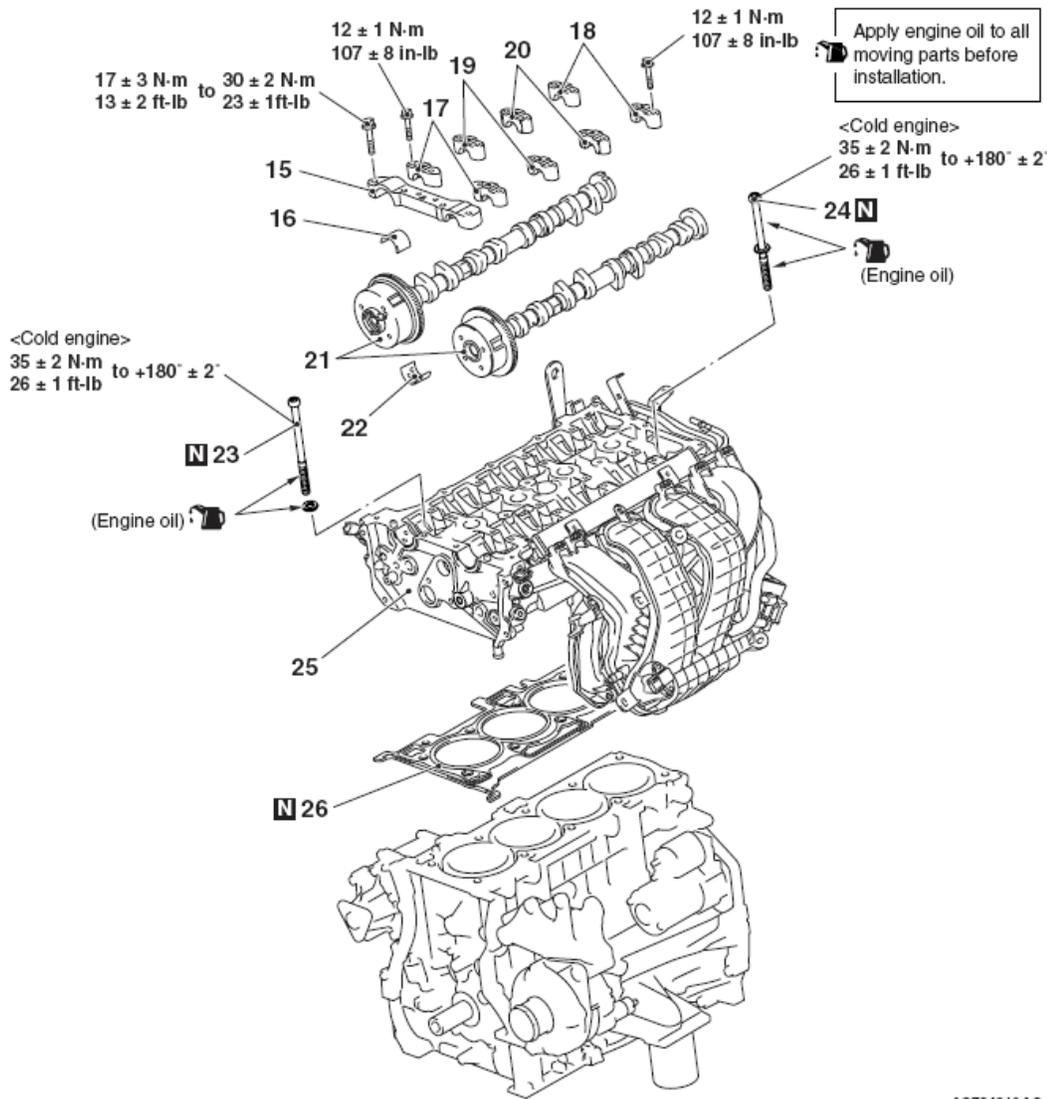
Identifying Cylinder Head Gasket And Components With Torque Specifications (1 Of 2)
